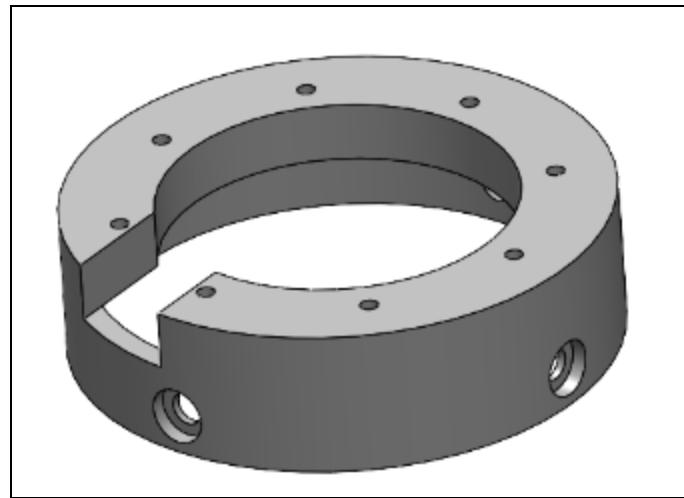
J3 Motor (AK80-6 & AK80-9)
